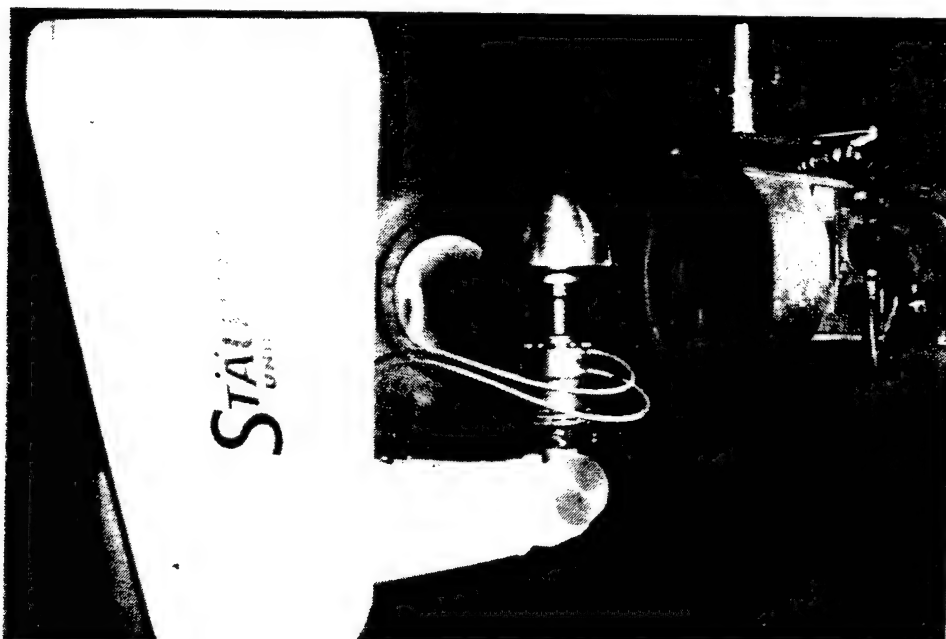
Robotic Arm and Nozzle/Tundish Housing During Wear- and Corrosion-Integrated Test Series.
